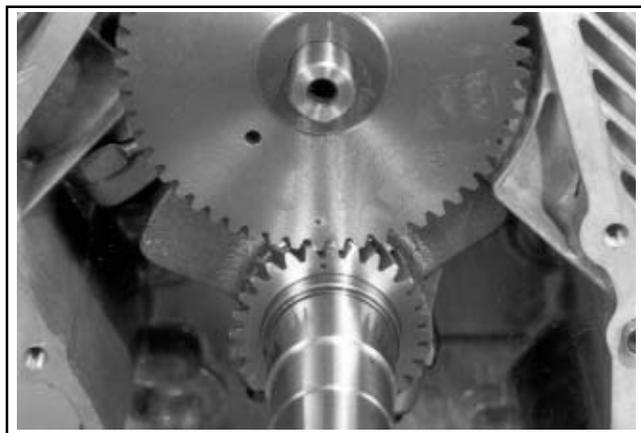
Aligning Crankshaft and Camshaft Timing Marks.
